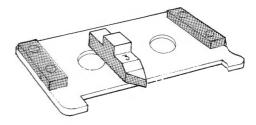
Tandberg Adjustment Plate with Tool No. 3.
